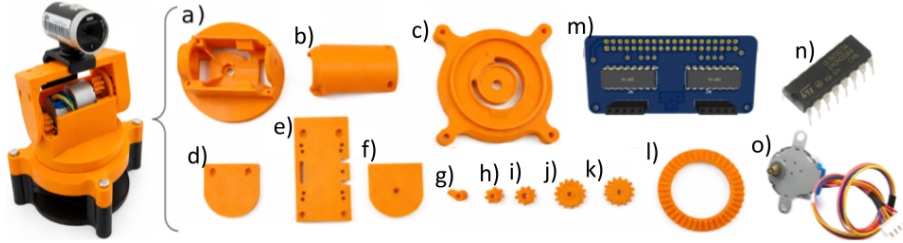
Gimbal parts printed in 3D with PLA filament: (a) main housing (body); (b) housing cover; (c) arm plate or base; (d) lateral support; (e) camera base plate or mount; (f) lateral support; (g) pointer; (h) 7-tooth gear; (i) 9-tooth gear; (j) 10-tooth gear; (k) 14-tooth gear; (l) 39-tooth gear. Hardware setup: (m) driver circuit; (n) ULN2003 module; (o) 28BYJ-48 stepper motor.
